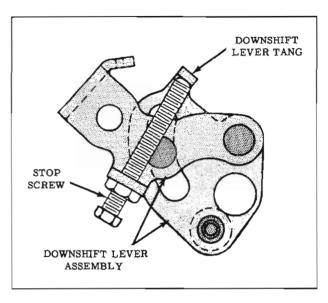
Throttle Downshift Stop Screw Adjustment
